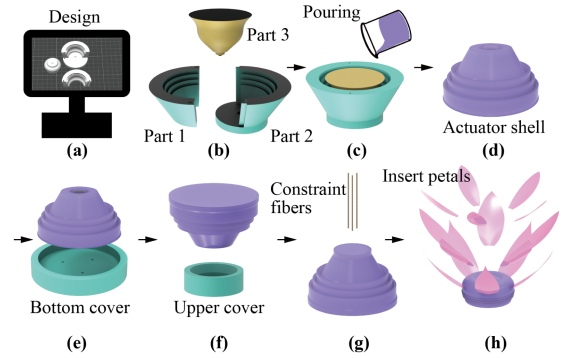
The fabrication process of the pneumatic actuator. (a) The mold design for pneumatic actuators. (b) The mold was fabricated and assembled. (c) The liquid silicone was poured into it for molding. (d) The pneumatic actuator shell. (e) Casting the bottom cover. (f) Casting the upper cover. (g) The constraint fibers were attached along the z-axis. (h) The artificial petals were affixed to the outer surface of the actuator.
